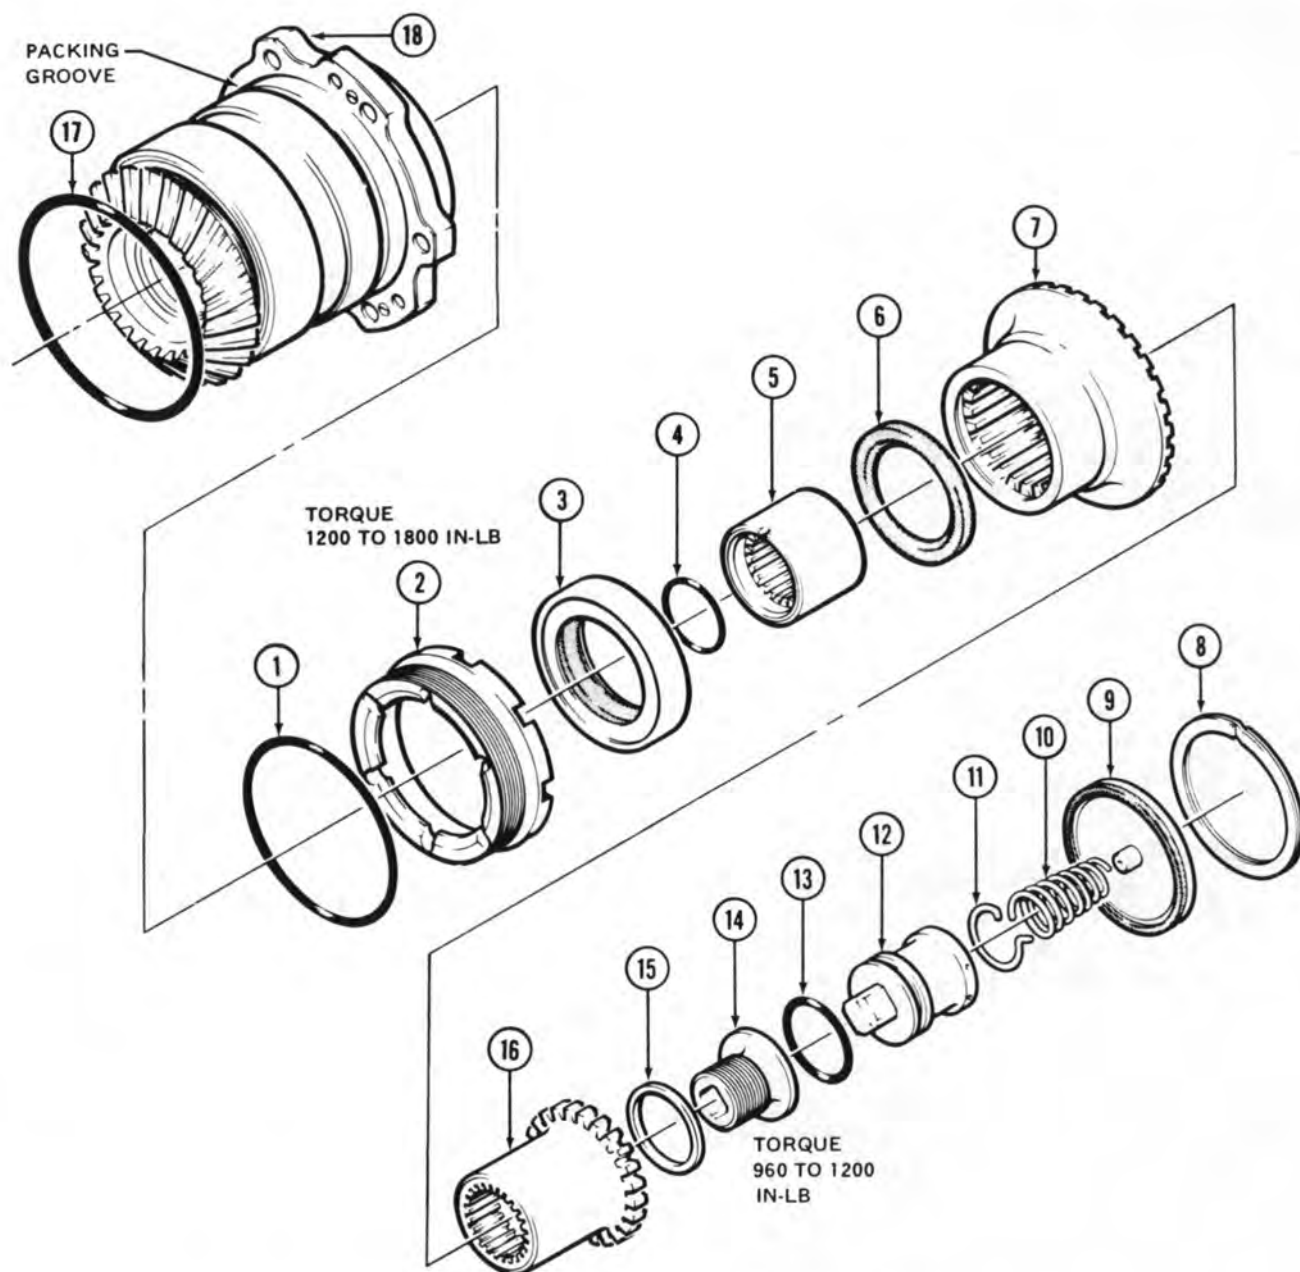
Damage Limits — Tail Rotor Drive Quill (Sheet 2 of 3)
